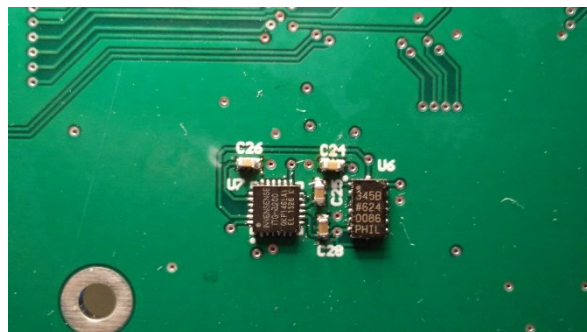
shows the fully assembled boards. The boards closely resemble the models presented in Figure 2.17.
